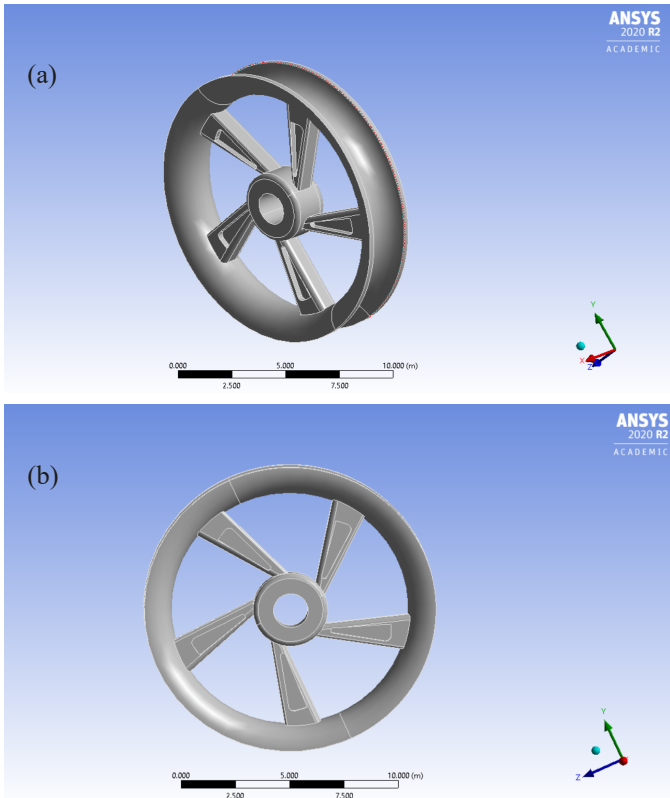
(a) Three dimensional view of wheel rim (b) Side view cross-section of the wheel rim
